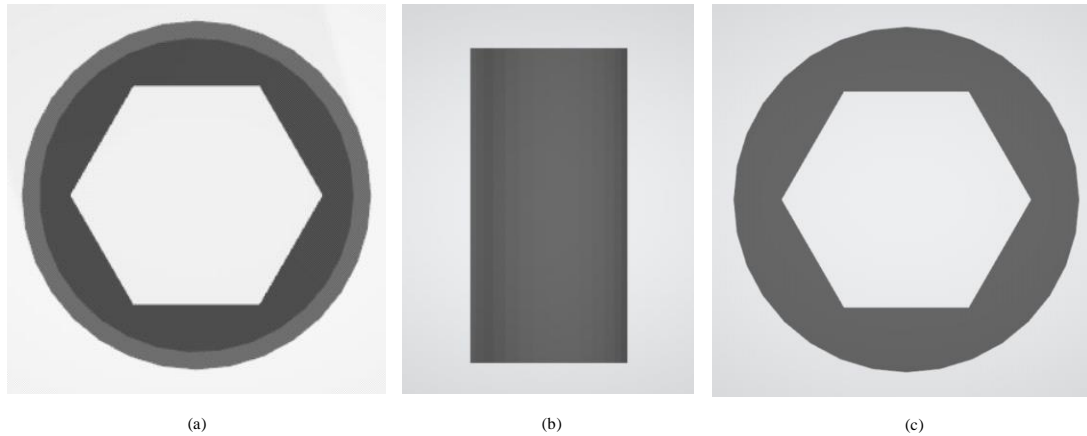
3D printed holder for photomultipliers used with the pilot-scale spray dryer. (a) Top view of the holder; (b) side view of the holder; (c) bottom view of the holder.
